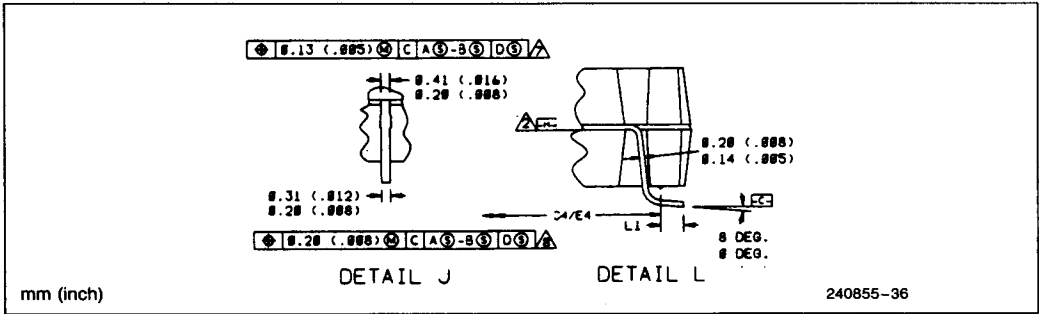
132-Lead PQFP Mechanical Package Detail—Typical Lead
